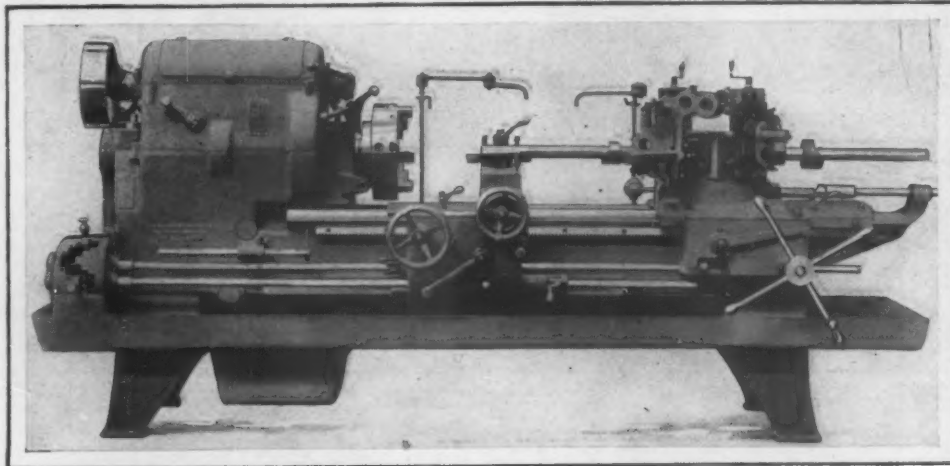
The New No. 3A Hollow Hexagon Turret Lathe with Chuckling Equipment Built by the Warner & Swasey Company, Cleveland, Ohio
